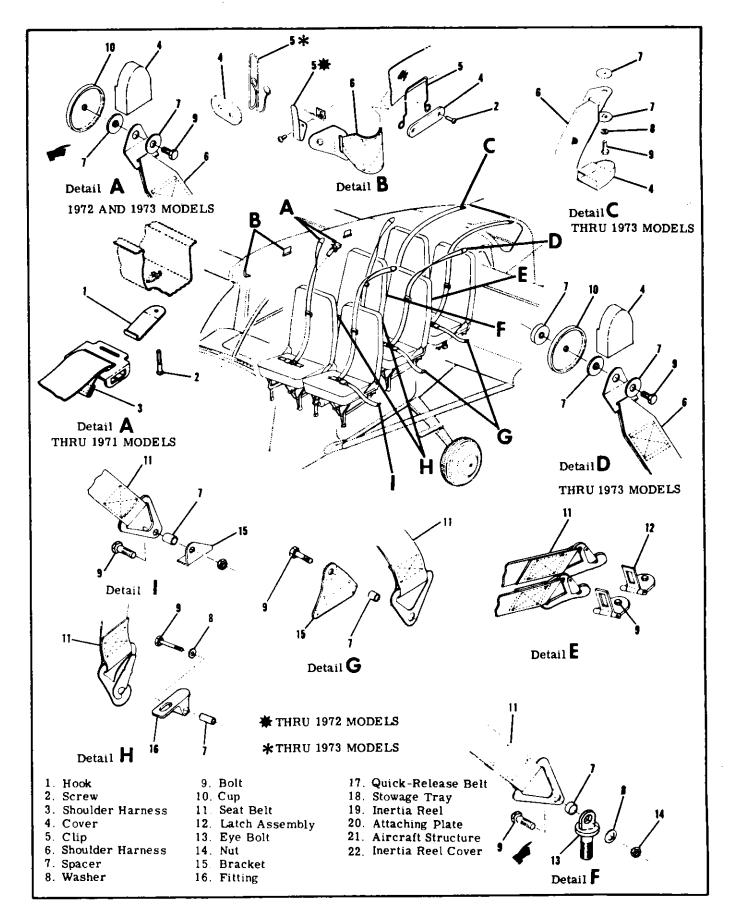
Seat Belt and Shoulder Harness Installation (Sheet 1 of 3)
